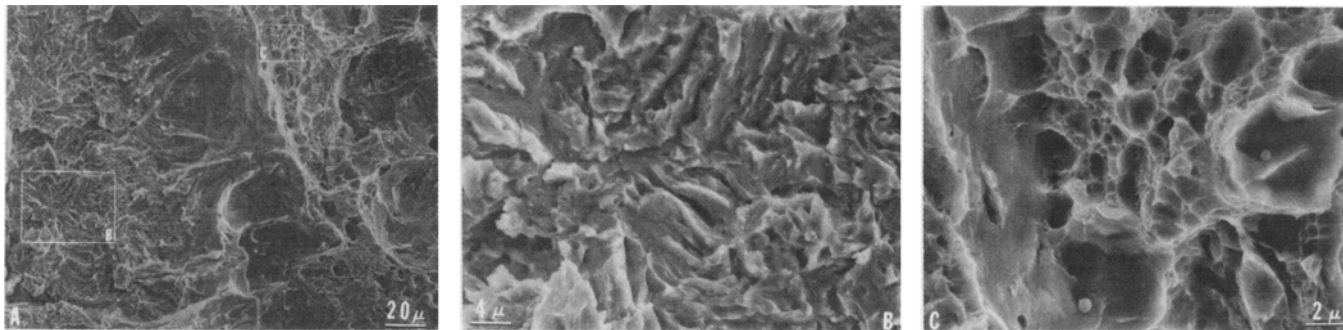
Scanning electron fractographs of a 3-point bend specimen broken after hydrogen charging. (a) Low magnification fractograph showing the presence of quasicleavage fracture. (b) High magnification view of the quasicleavage fracture surface. (c) High magnification view of a region of ductile fracture.
